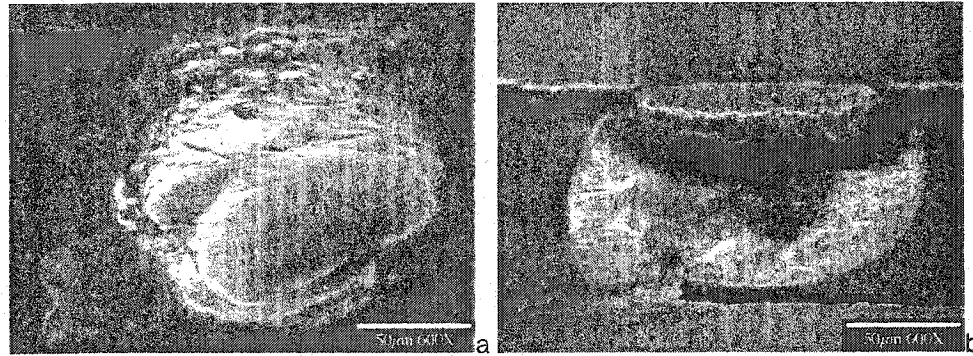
Secondary SEM of M53 after failure (a) solder joint A (b) solder joint B
